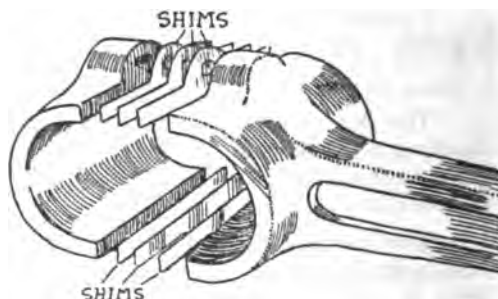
Connecting-rod bearing end with cap removed to show shims
